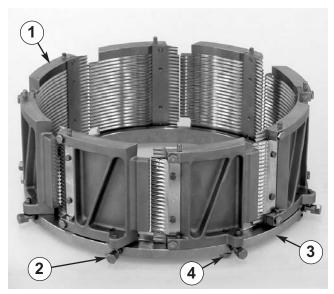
Cutting head upside down for maintenance. (1) Shoe, (2) Adjusting Screw, (3) Top Support Ring, (4) Fastener for Shoe
